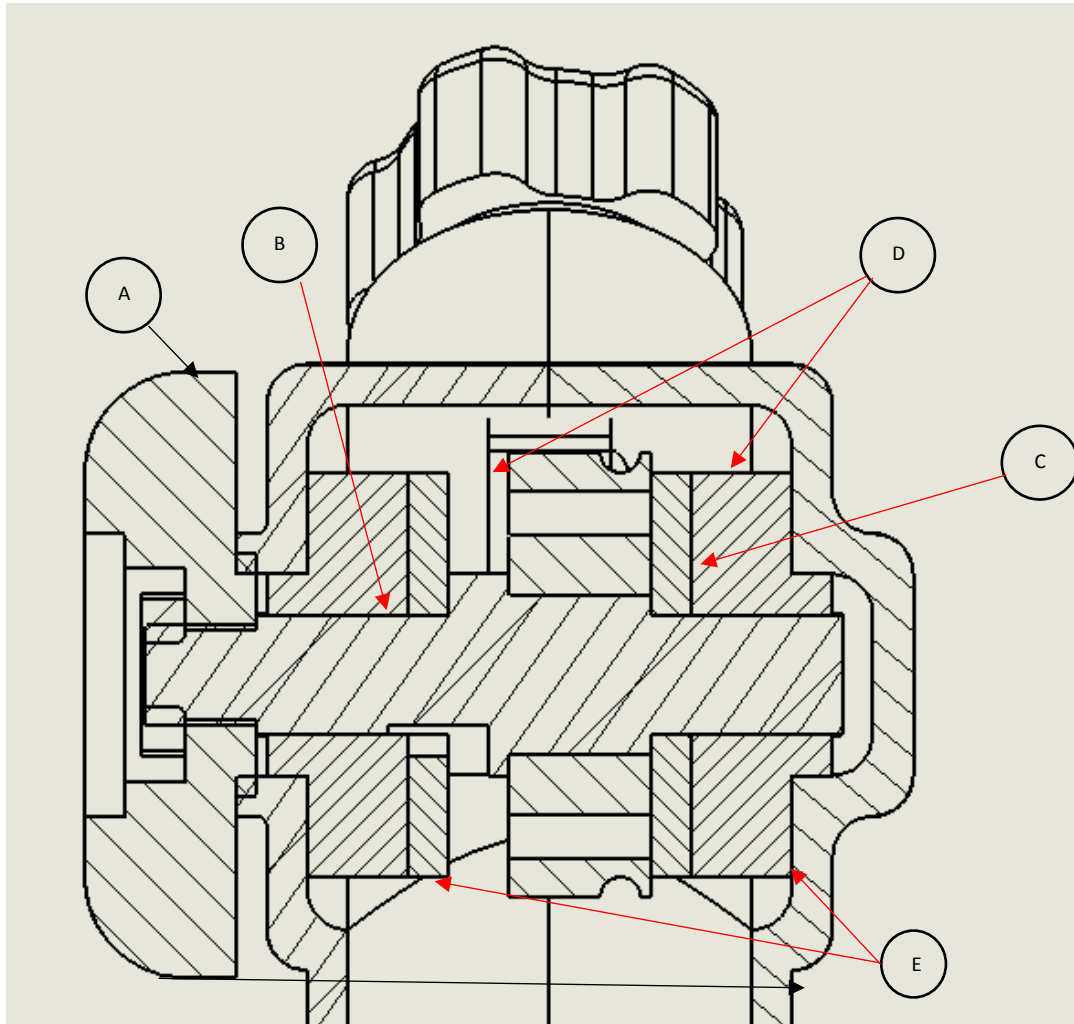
A cross-sectional view showing the interaction of the angulation knob, knob shaft and the friction plates
